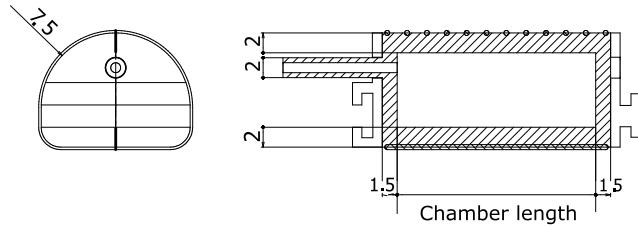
CAD drawings: cross sections and dimensions of joint-modular actuator.
